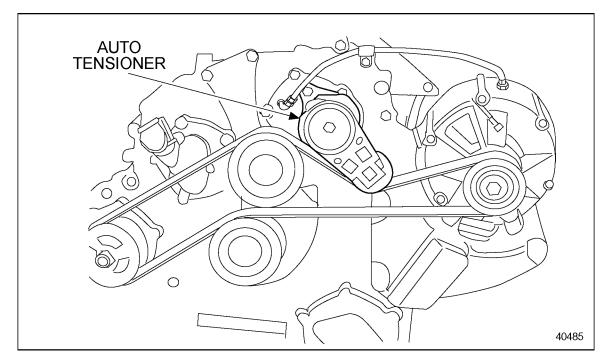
Auto Belt Tensioner Assembly with 50 DN Alternator
